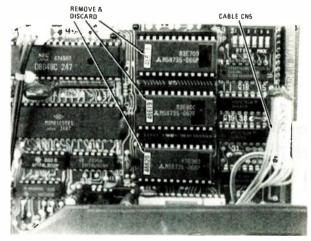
Detail view of the ROM's (3) and the cable CN5. The 3 ROM ICs are removed and discarded, the cable CN5 may require disconnection.
